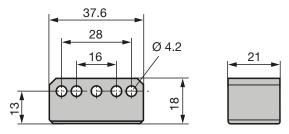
Installation dimensions of BTL6-A-3801-2 magnet
